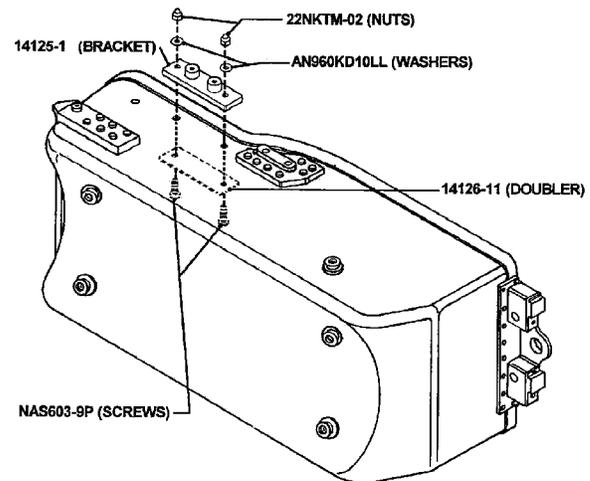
Installation of Bracket Assembly (P/N 14125-1)
